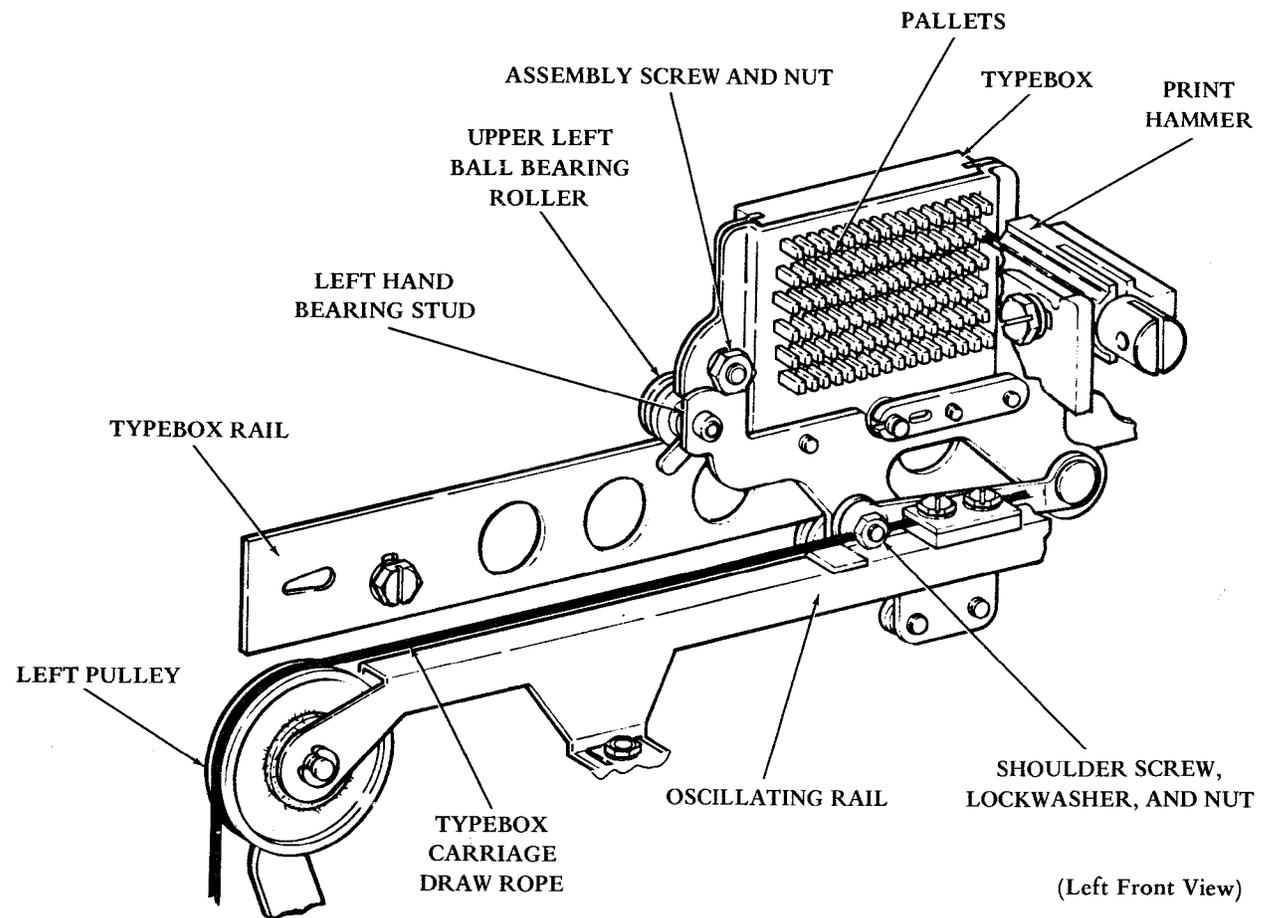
Typebox, Typebox Carriage and Oscillating Rail
